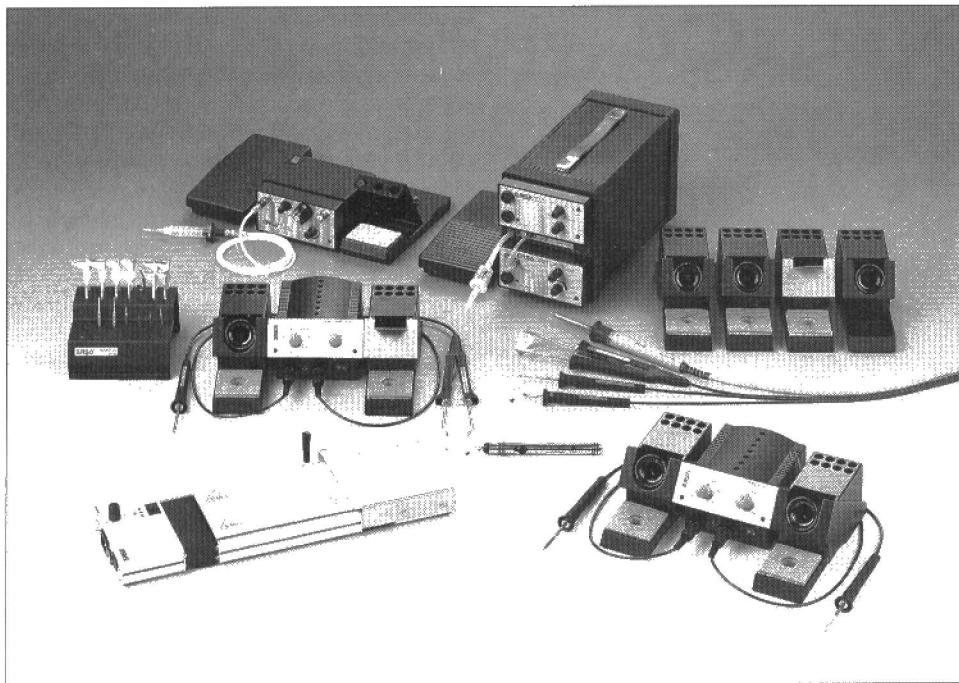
The soldering iron is still widely used for repairs on existing boards. Over the past decade, manufacturers of soldering irons have developed a wide range of accessories to enable SMDs to be soldered also (photograph courtesy Ersa).
